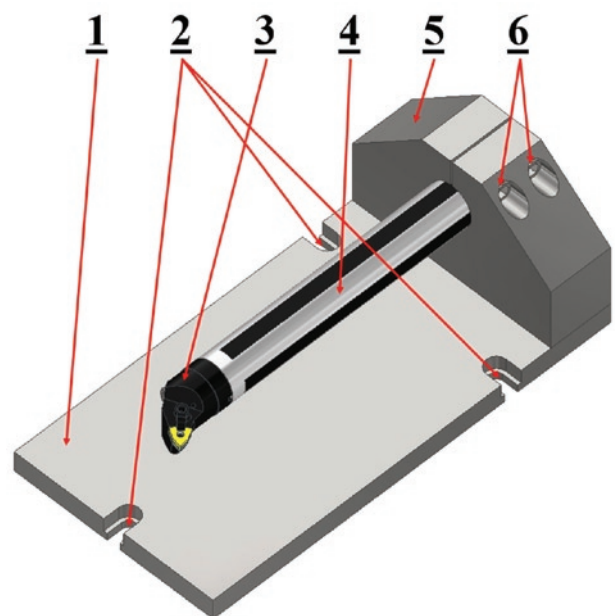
Three-dimensional model of the test stand: 1 – base, 2 – mounting holes, 3 – boring bar head, 4 – shank, 5 – support, 6 – fixing screws
